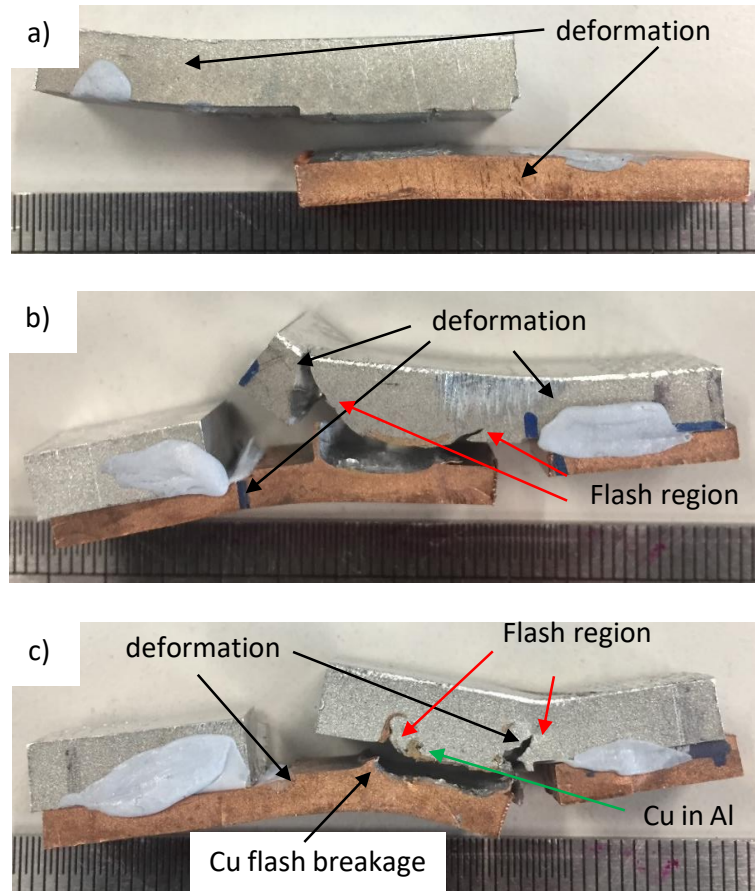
8 Fractured tensile shear sample of welds with (a) d_p of 0.1 mm; (b) d_p of 0.2 mm; (c) d_p of 0.5 mm.
